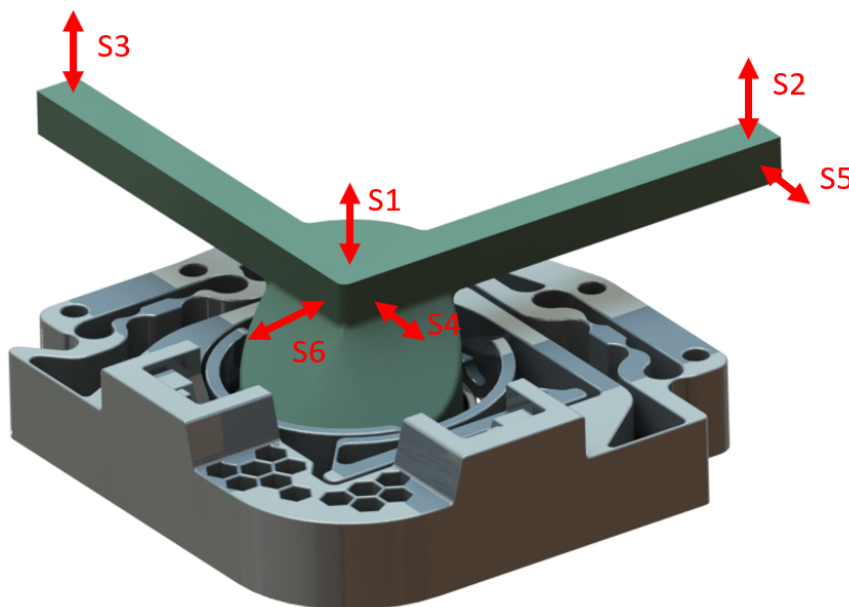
A printable measurement tools with 3 planes which are defined by 6 measurement points
